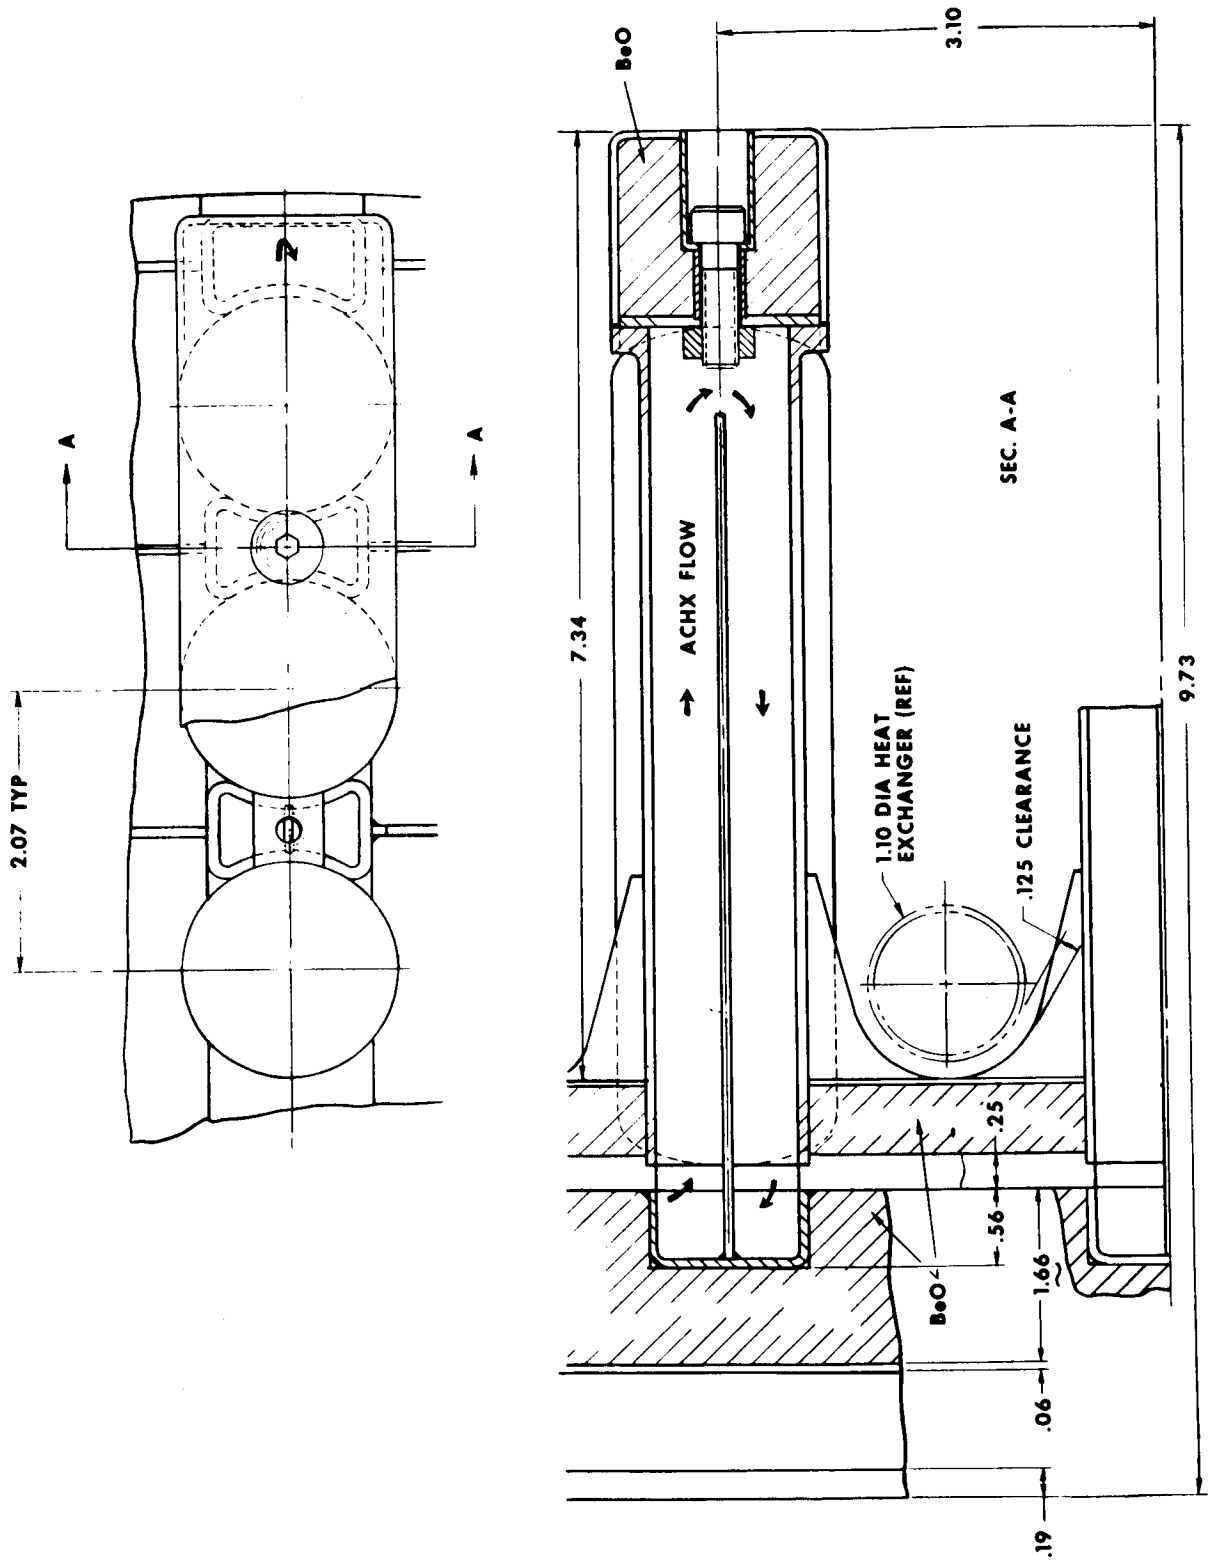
MECHANICAL DETAILS OF PIN CUSHION ARRAY
